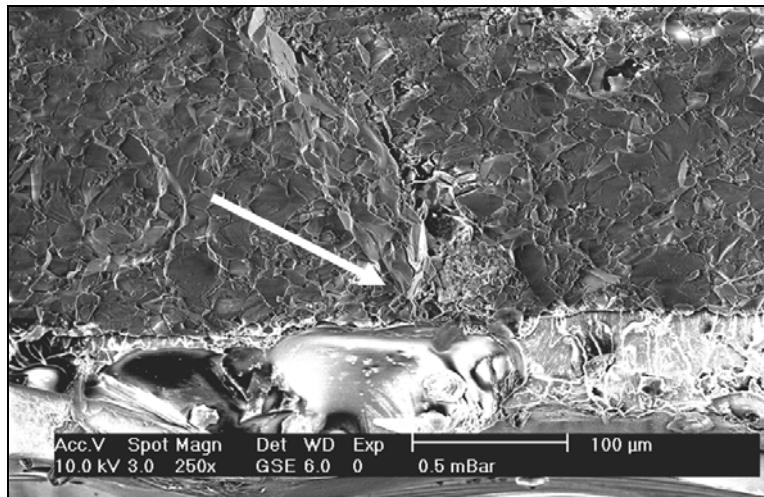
Fracture surface micrograph showing a strength-limiting orthogonal surface machining crack in an alumina flexure specimen coated with a single layer of film adhesive. The white arrow indicates the failure origin on the tensile surface.
